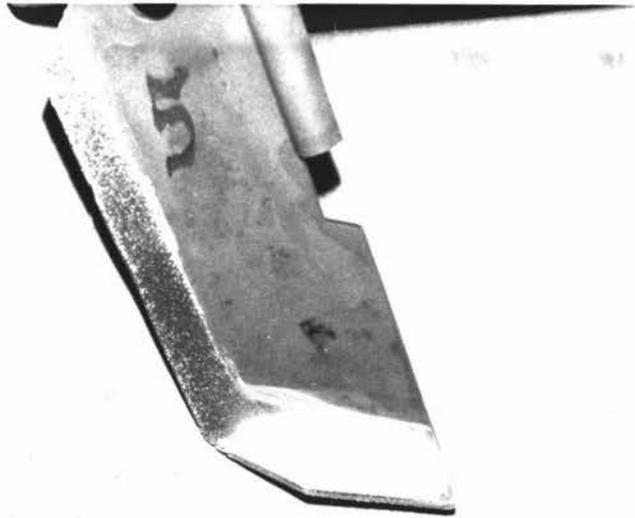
Run B: Cobalarc arc welded over mild steel.
